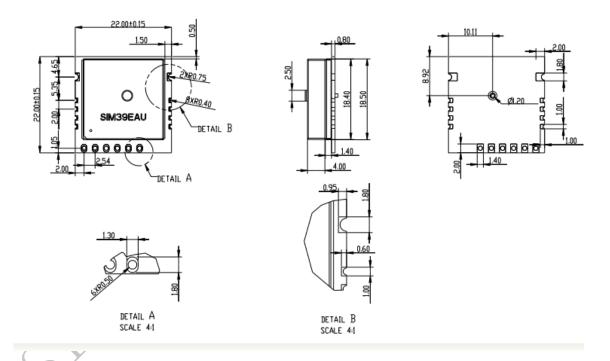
SIM39EAU mechanical dimensions (Unit: mm)
